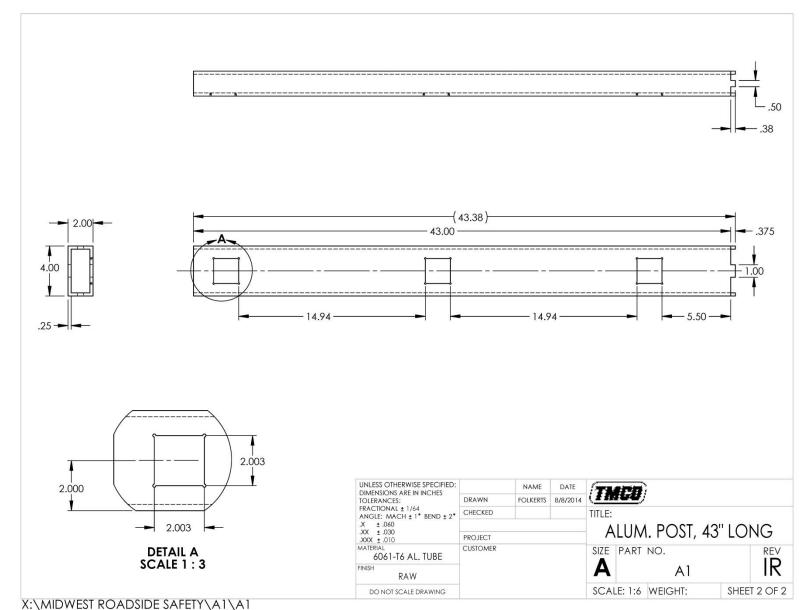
Fabrication Drawings, Test Nos. APR-1 and APR-2
